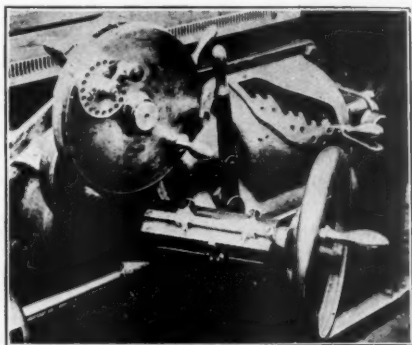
Quick hand motion fitted to grinding machine wheel head.
